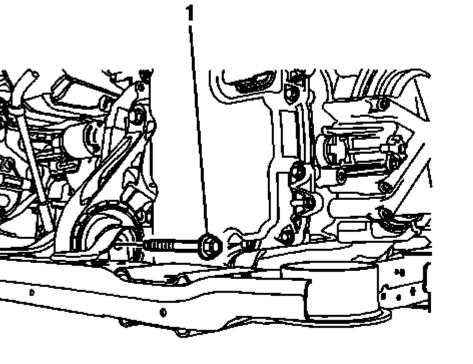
Transaxle Mount & Attachment Bolts Courtesy of GENERAL MOTORS COMPANY
